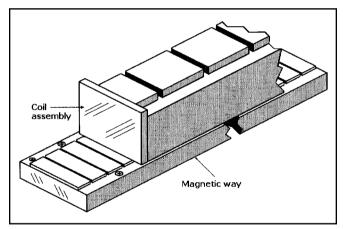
A linear iron-core linear servomotor consists of a magnetic way and a mating coil assembly.
